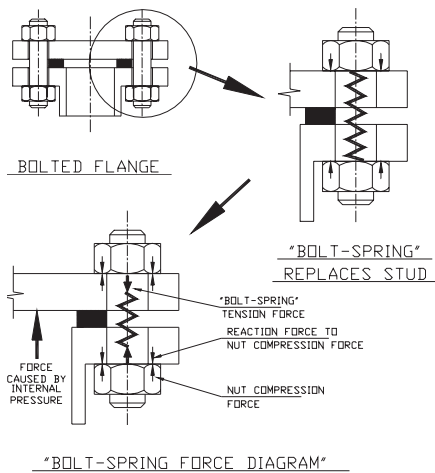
The Forces Acting on a 'Bolt-Spring'
